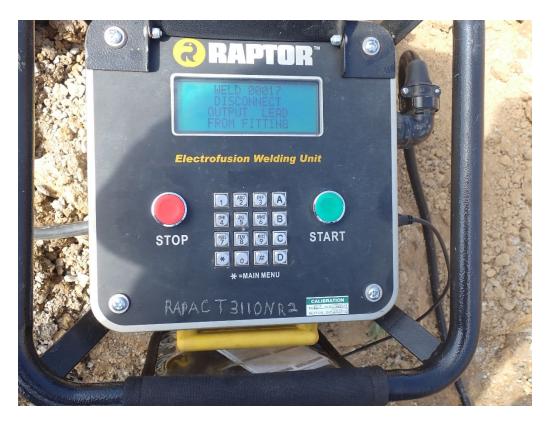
, Electrofusion Unit indicating that the weld is completed and the leads can be disconnected
